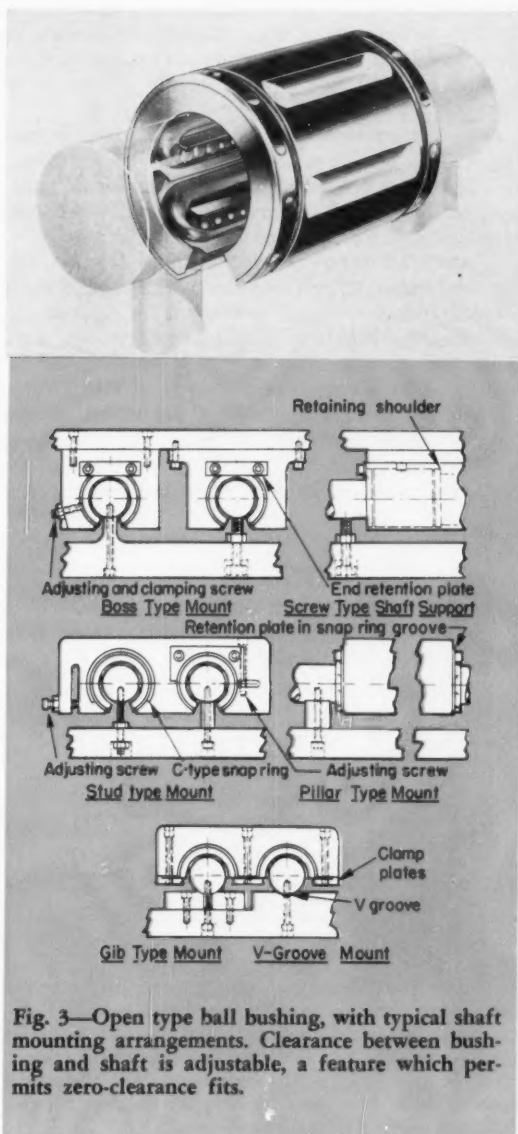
Open type ball bushing, with typical shaft mounting arrangements. Clearance between bushing and shaft is adjustable, a feature which permits zero-clearance fits.
